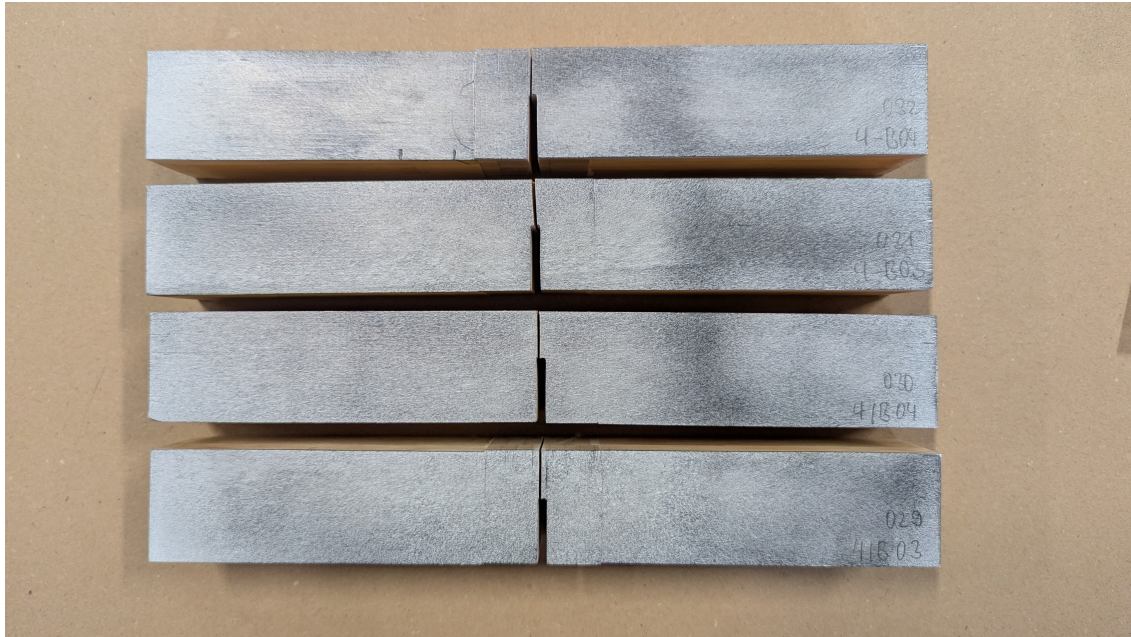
Fractured SENB specimens after testing, showing the central notch and the Mode I crack.
